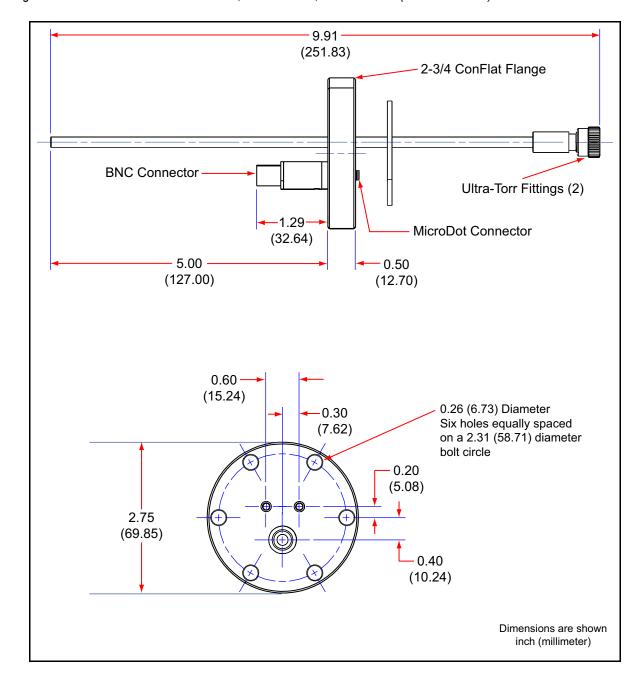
2-3/4 in. Conflat with three tubes, one electrical, with Ultra-Torr (PN 750-685-G2)
